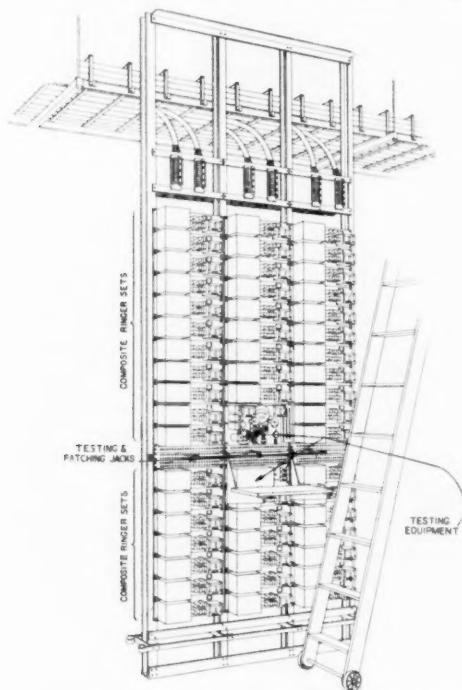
Typical Assembly of Group of Composite Ringer Sets
